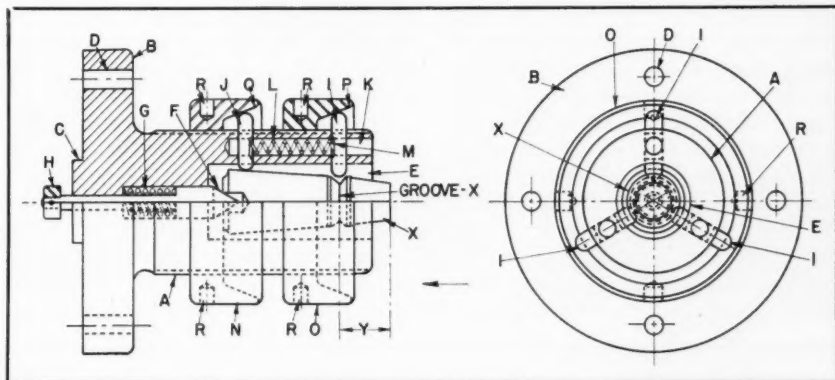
Drawing illustrating design of special chucking fixture for locating and holding contoured workpieces.
